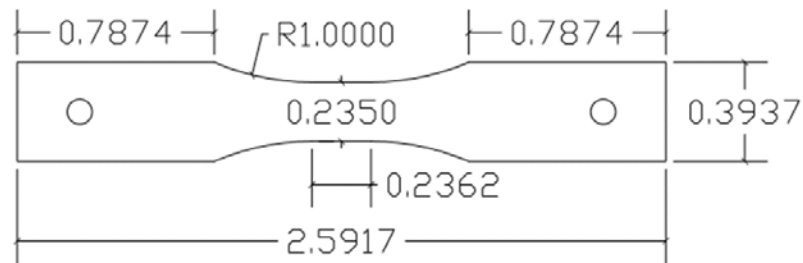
Shape and dimensions of the fatigue specimens in inches
